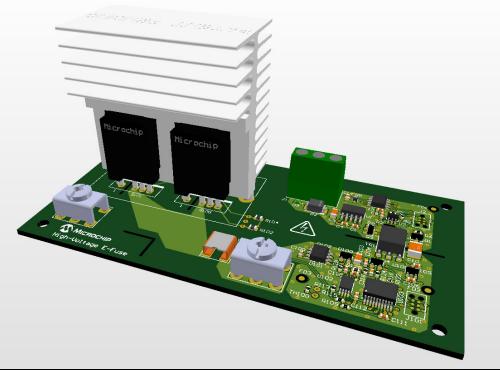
High-Voltage Auxiliary E-Fuse PCB Assembly (Top 3D View).
